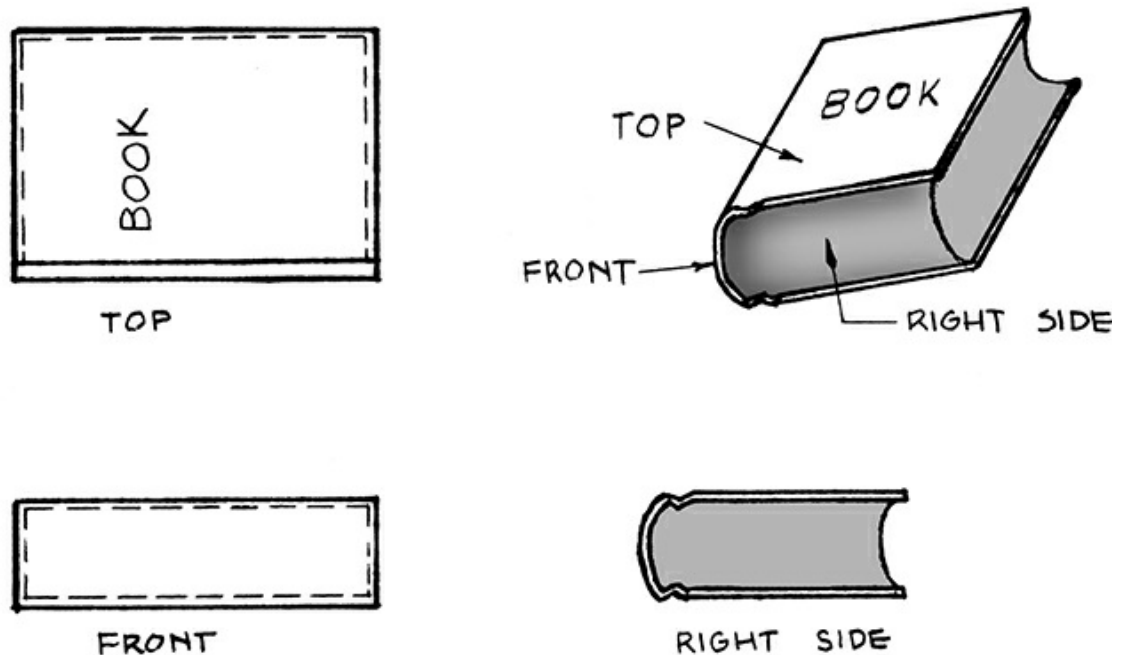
Here are shown the three regular views appropriate for an orthographic projection of a book. Whenever you lay out the three regular views of an object, try to choose those three surfaces that will show the most detail; that is, choose the views that will give the best shape description.
